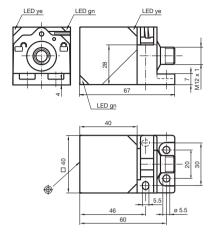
Dimensions NBB20-L2-A2-C-V1
